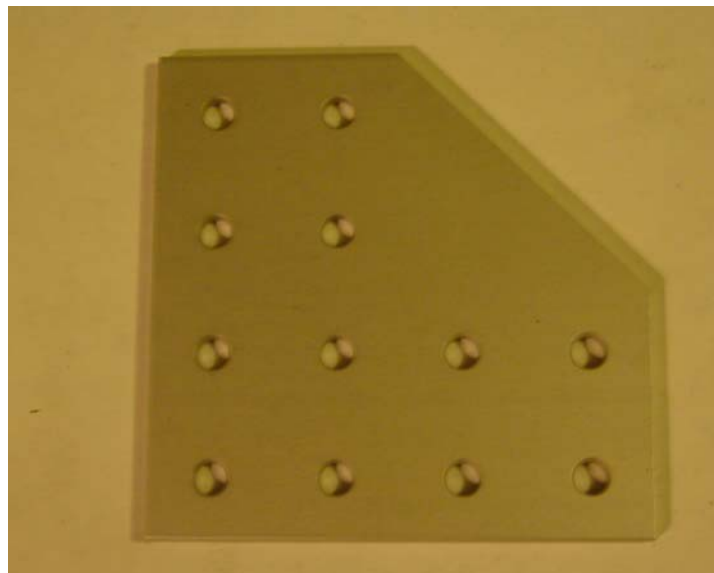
80/20 Corner Joining Plate used for Connecting Two or Three Rails (depending on joint specifications)
